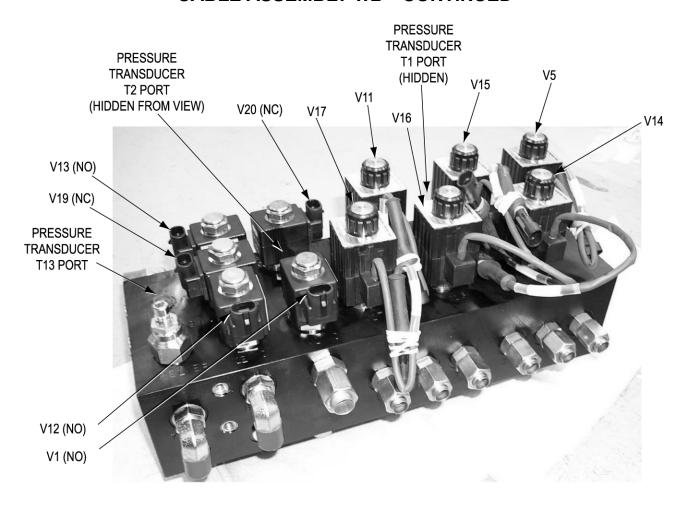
Electrical Connections on Primary Manifold Assembly
